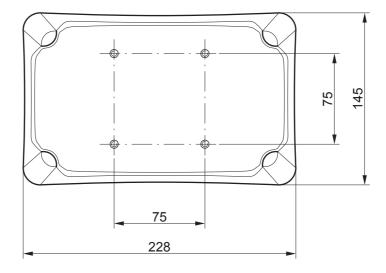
LR-3 mounting hole layout on the back side of the Reader (units of measurement: mm)
